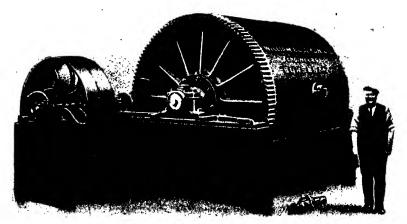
Boulton's (Burslem) grinding cylinder.
